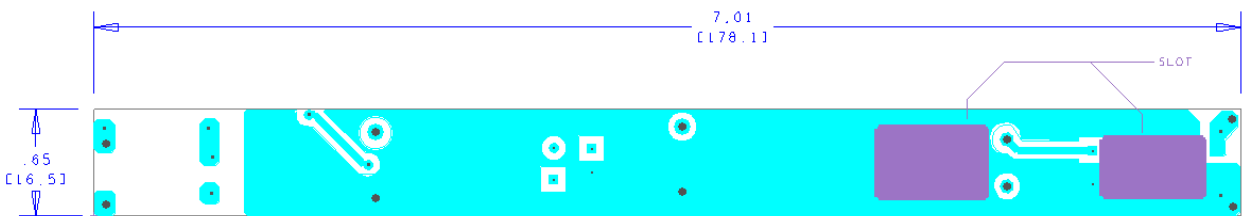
Printed Circuit Layout for D Package.Bottom View.
